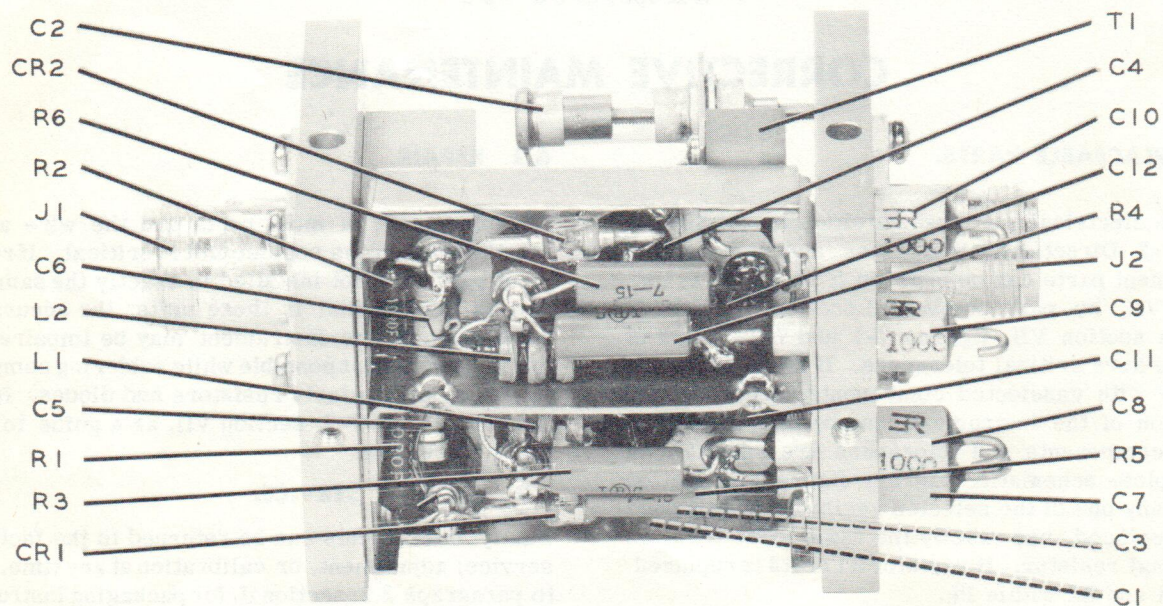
302C-1 and 302C-2 Coupler Unit, Shield Removed
